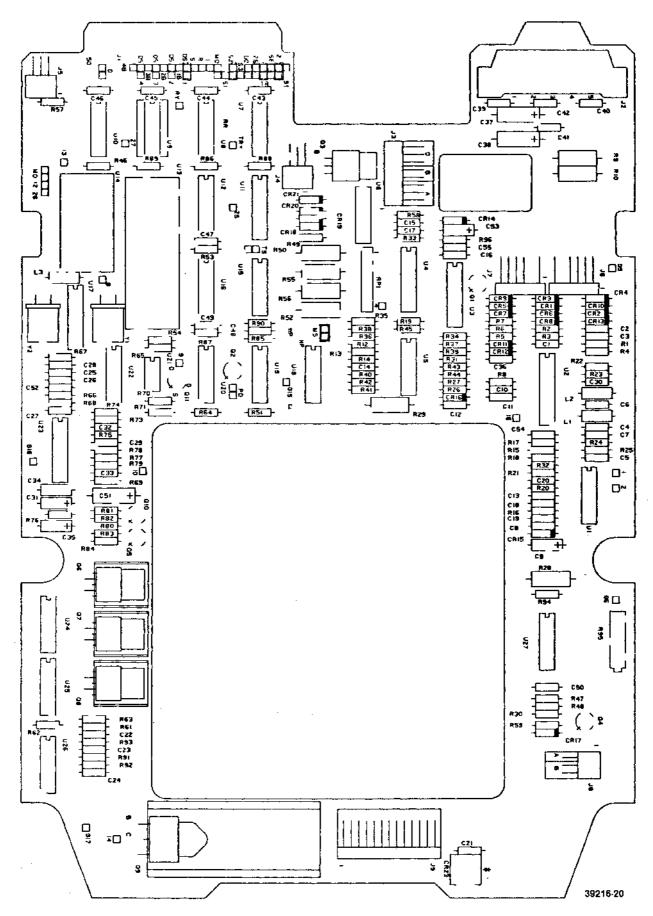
PCB COMPONENT LOCATIONS (P/N 25227 AND 25247)
